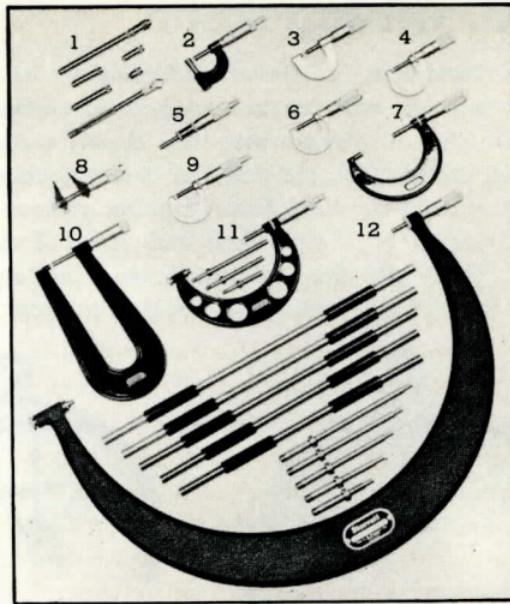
A few of the many types and sizes of Starrett Micrometers: 1, an inside micrometer caliper with extension rods; 2, a 1-inch tube micrometer for measuring tubular walls; 3, a screw thread micrometer for screw threads; 4, a 1-inch micrometer with lock nut; 5, a 1-inch micrometer head; 6, a 1-inch micrometer with thimble friction and lock nut; 7, a 1½-2½ inch crank-shaft micrometer; 8, a 1" inside micrometer caliper; 9, a 1-inch micrometer with lock nut and ratchet stop; 10, a deep throat micrometer for sheet metal work; 11, a 0-4 inch micrometer with interchangeable anvils; 12, a tubular frame micrometer with standards and interchangeable anvils for measurements from 12 to 18 inches.
